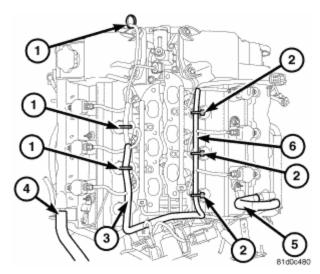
Identifying 2.7L Engine Wiring Harness Courtesy of CHRYSLER LLC
